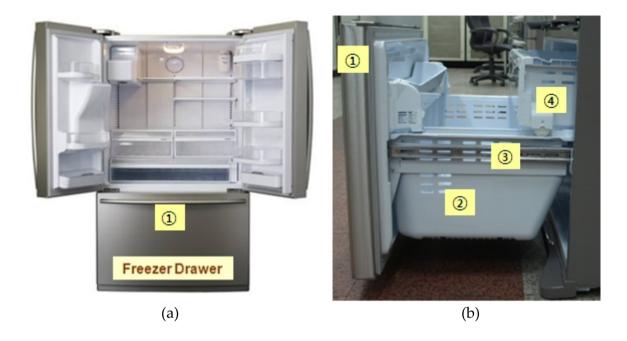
Refrigerator and drawer assembly. (a) French refrigerator (b) Mechanical parts of the drawer: handle ①, drawer ②, slide rail ③, and pocket box ④
